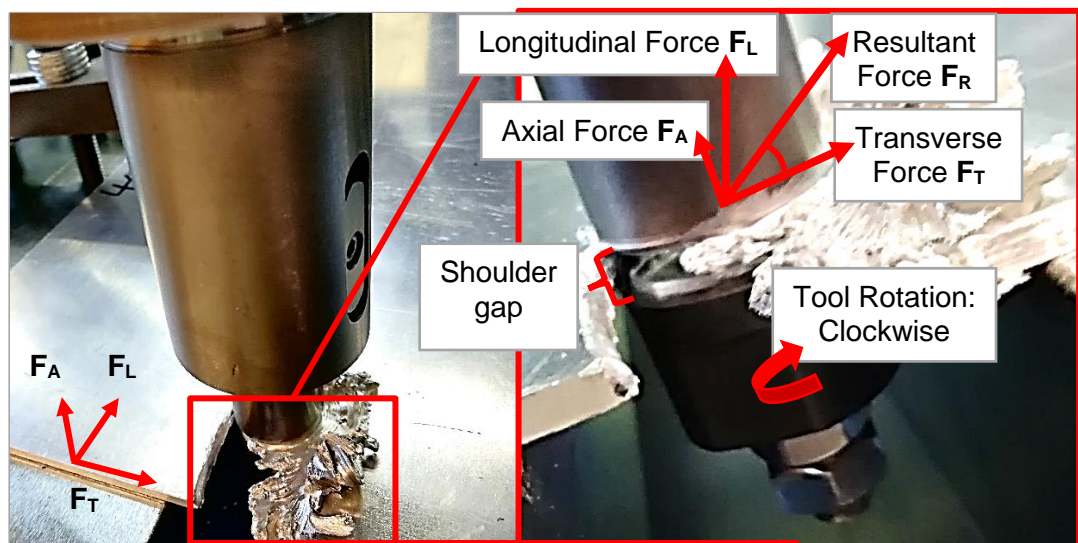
Bobbin FSW tool-induced weld force magnitudes and orientation
